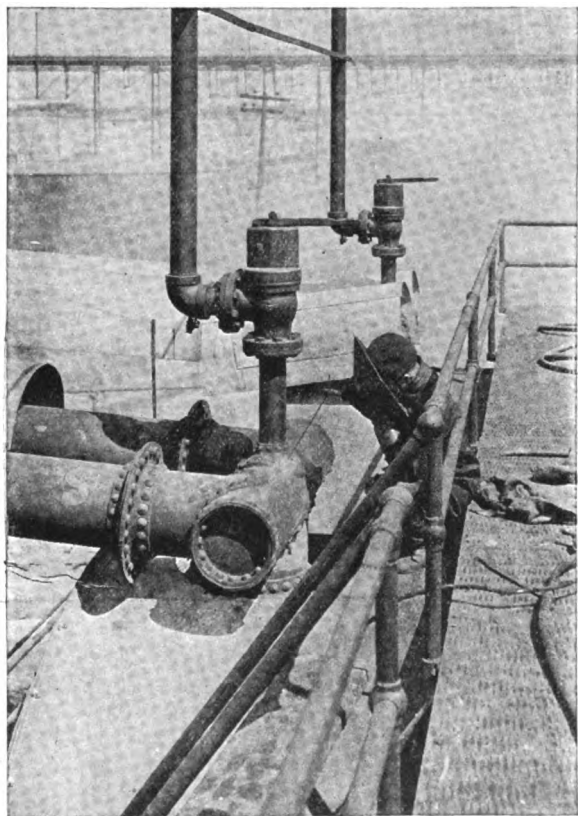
Electric Arc Welder used by the Standard Oil Co., to caulk leaks in vapor lines and oil stills. The vapors are very inflammable and every joint must be absolutely tight, hence welding is used in addition to riveting. (See Fig. 73.)
